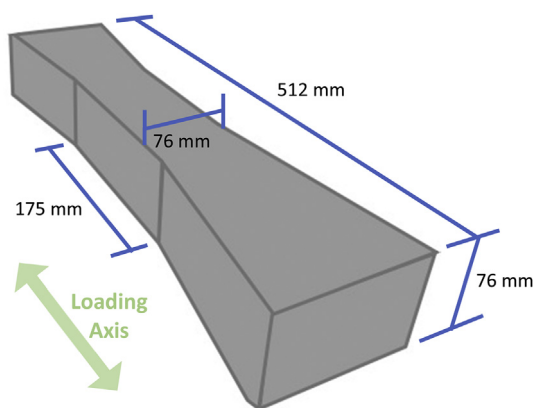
The large dogbone shaped specimens have a gage section cross-section approximately 76 × 76 mm, and gage length of ~175 mm. Specimens are loaded along the major axis.
